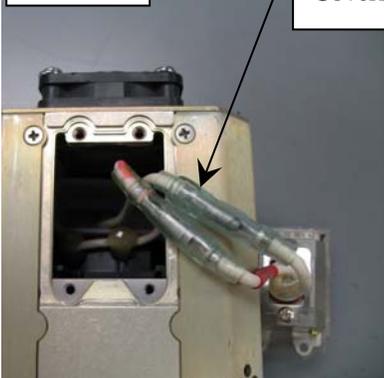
Reconnect the lamp terminals to mating terminals inside unit lamp pocket. Ensure terminal covers are completely engaged and completely cover the connected terminals. These covers prevent high voltage shorting inside the unit.
